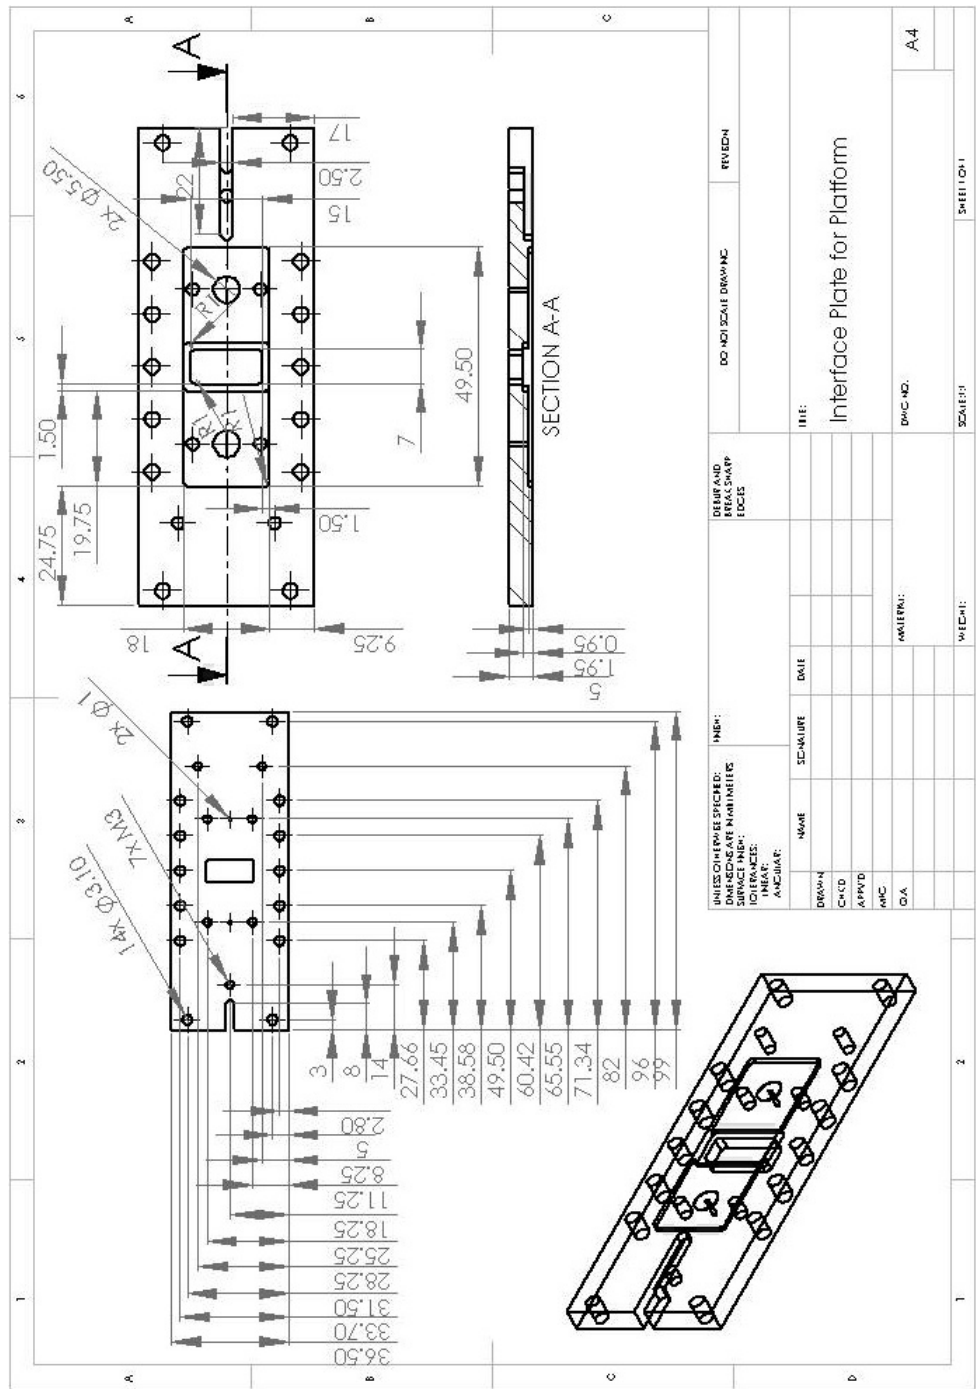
Interface plate for the microfluidic platform - Dimensions in mm.
